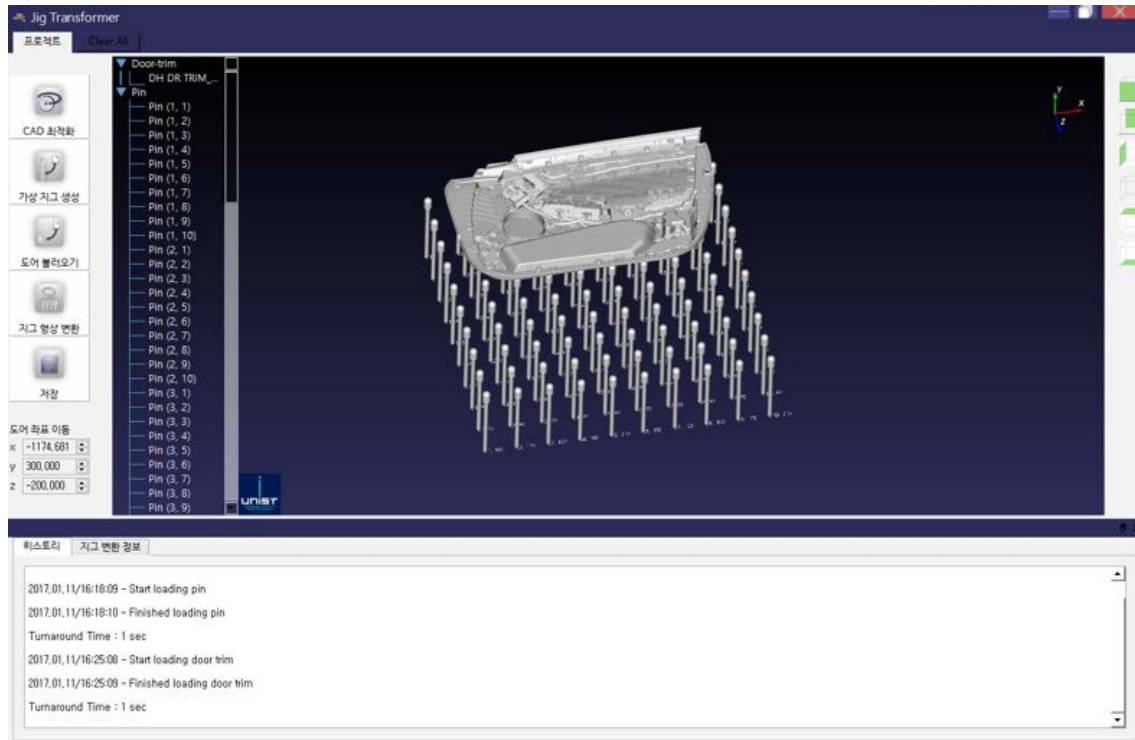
8 Initial setup of 3D Pin-Jig Shape Transformer
